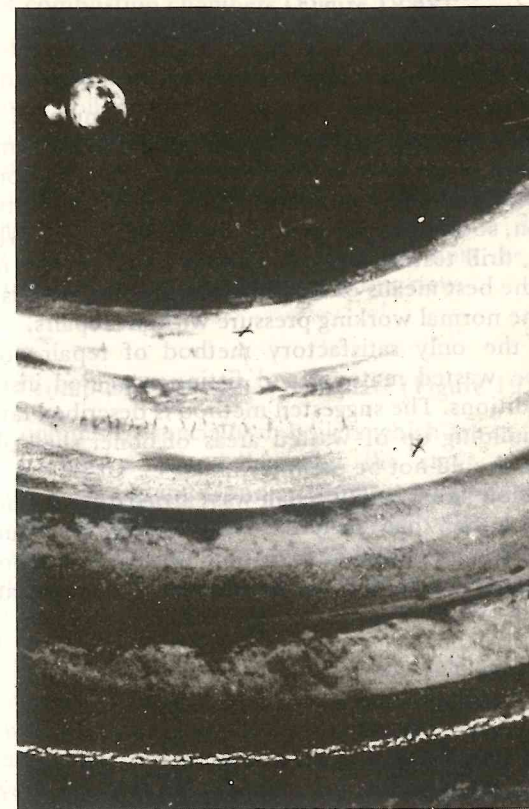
Thermal cracking in packaged type boiler furnace as a result of flame impingement
